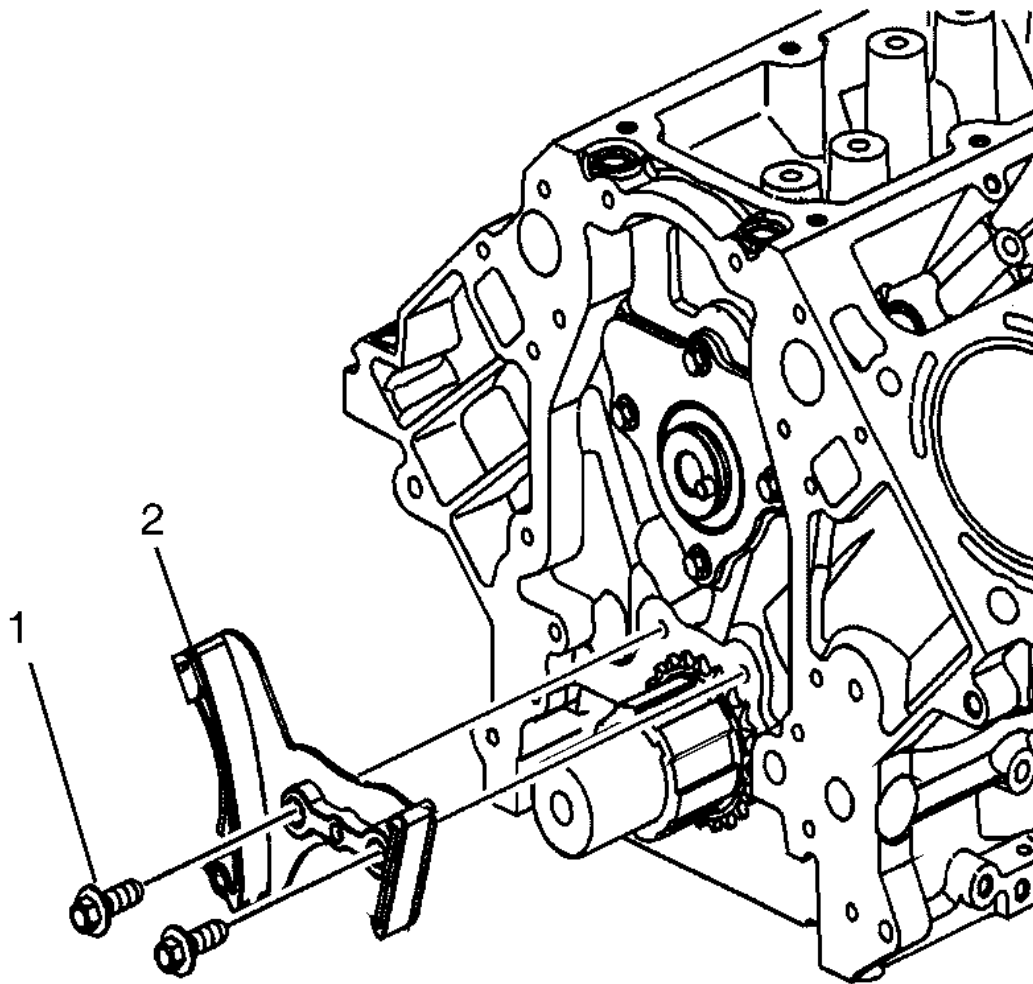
Identifying Timing Chain Tension Bolts & Tensioner
